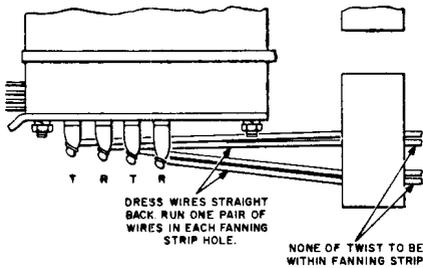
Termination of Wire on Type 444 Jack at MDF
